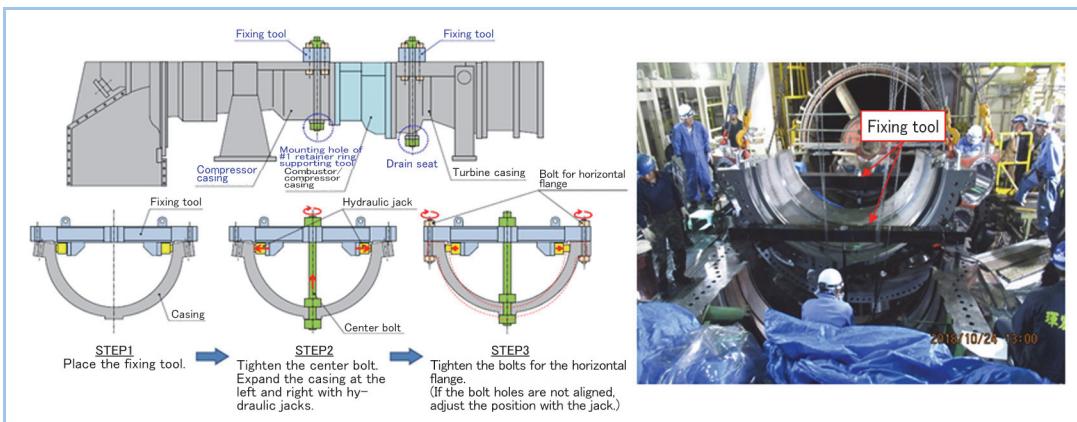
Fixing tool for correcting egg-shaped deformation of existing casing
